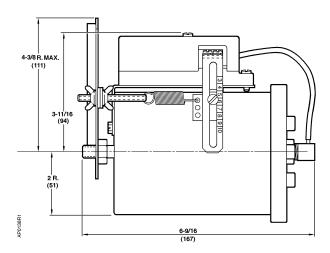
No. 3 Actuator with the RL 147 Positioning Relay Mounted Dimensions.
